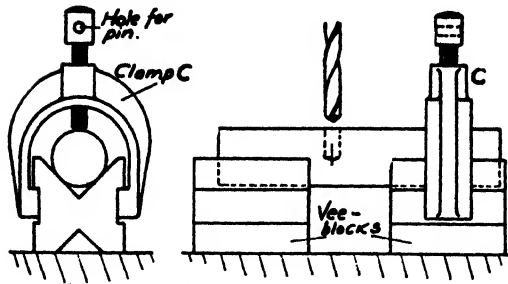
Using Two Vee-blocks and a Clamp for Drilling Cylindrical Parts.
